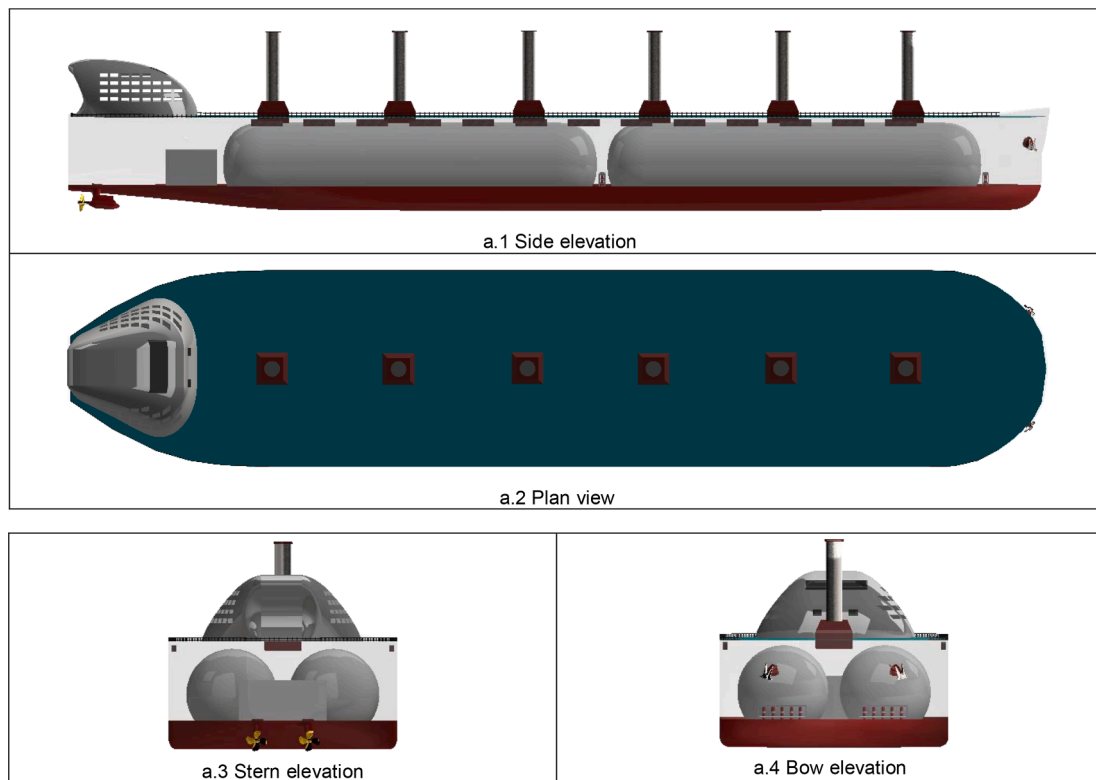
JAMILA LH₂ tanker ship 3D design including 6 Flettner rotors design; (a1) Side elevation (a2) Plan view; (a3) Stern elevation and, (a4) Bow elevation.
